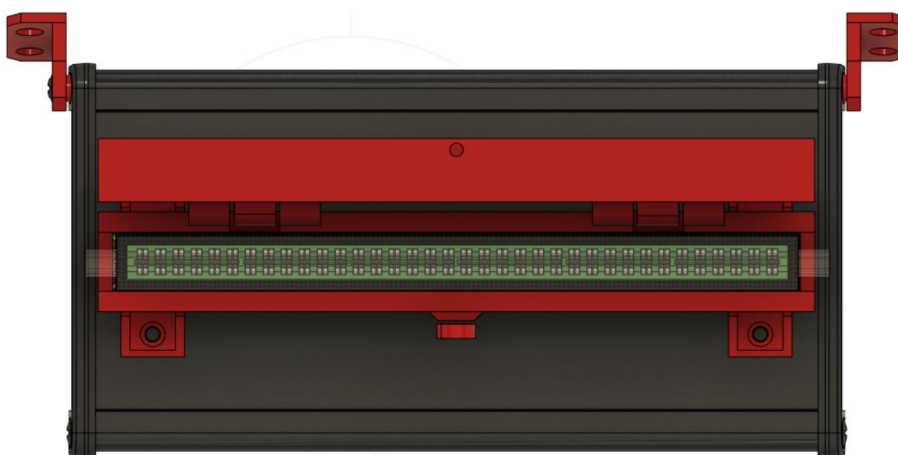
Top view of the sensor detection chamber CAD model, shown in the open position.
